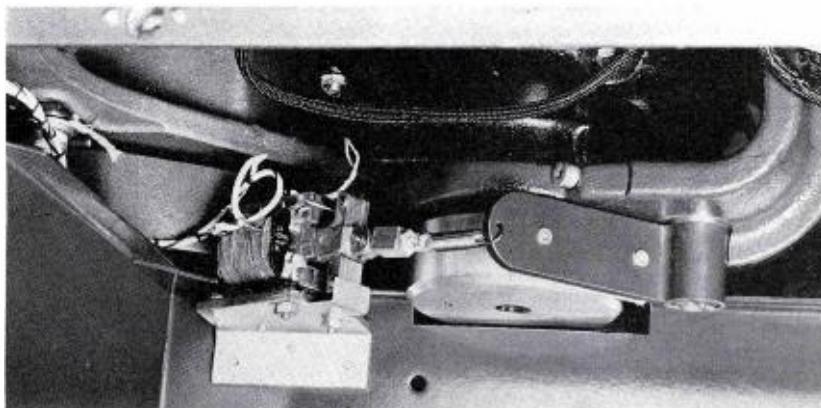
The brake assembly is mounted directly on the casting which supports the main projector drive motor.
